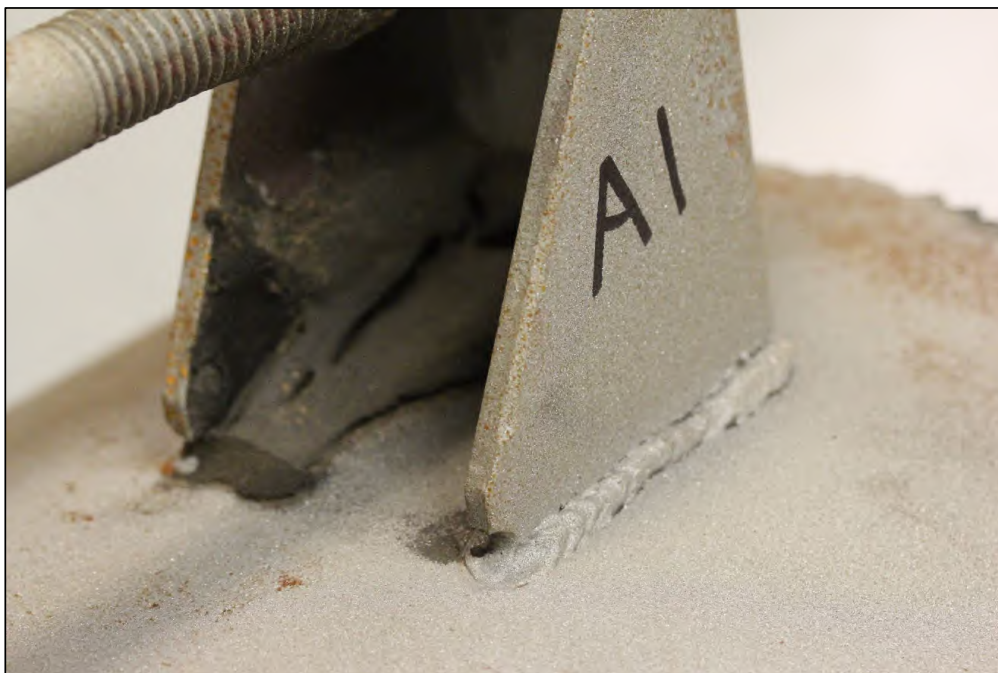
Image of the Lug A1 welds showing undercut. The interior weld shown was obscured by deposits.
